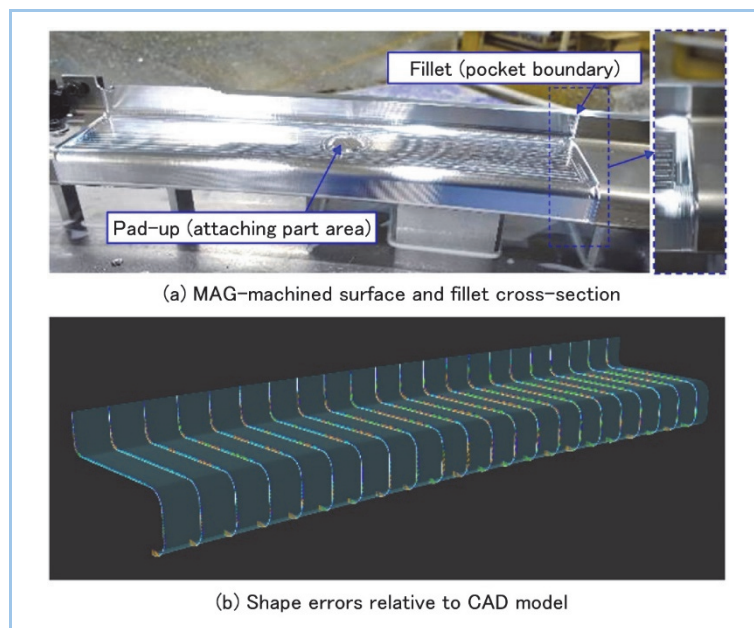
Frame MAG-machined surface and characteristic pocket shape
